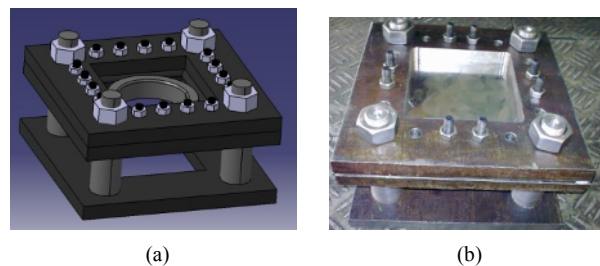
(a) Blank holder; (b) holder with fastened blank.
